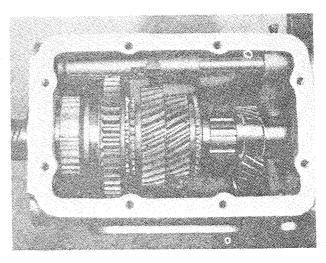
Fitting Mainshaft Circlip with Churchill Tool No. 20SM. 46.
